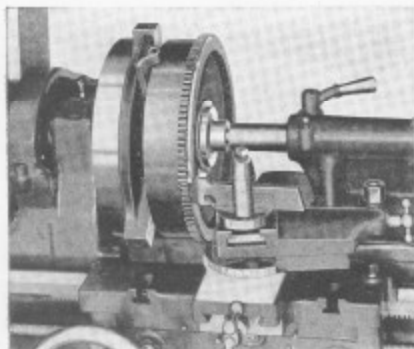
Turning Teeth Off a Flywheel for New Steel Starter Gear.
